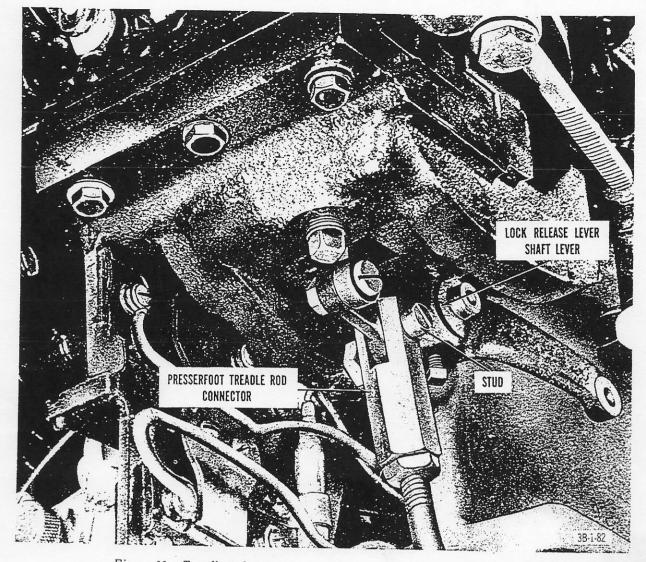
Treadle rod connector installed on lock release lever shaft lever
